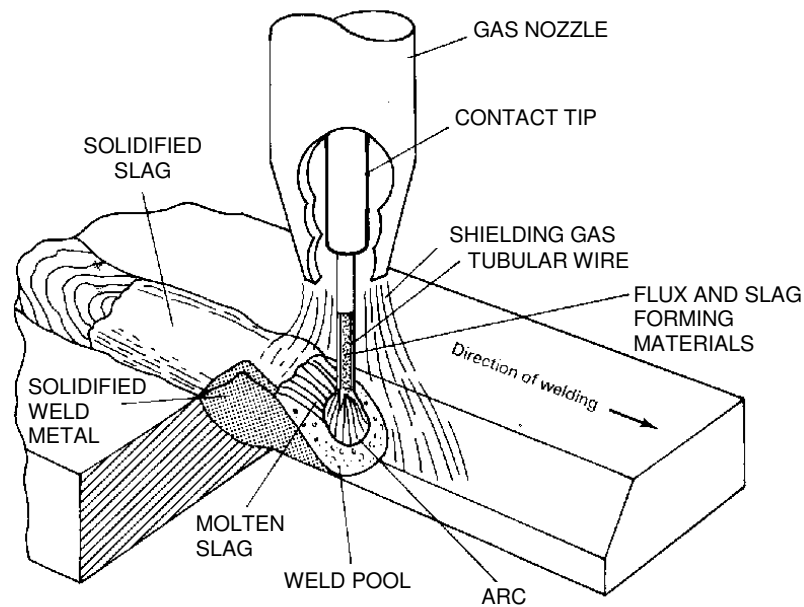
1 A schematic illustration of the gas shielded FCAW process (after ASM Welding Handbook, Vol. 6, 1993).
